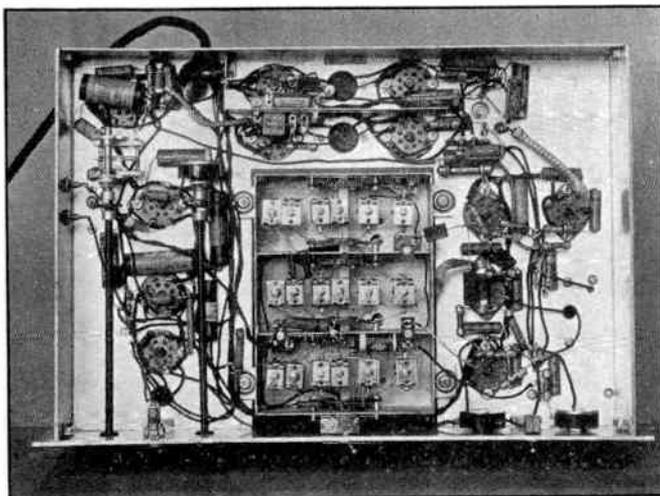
THE UNDER-CHASSIS ASSEMBLY OF THE RECEIVER
